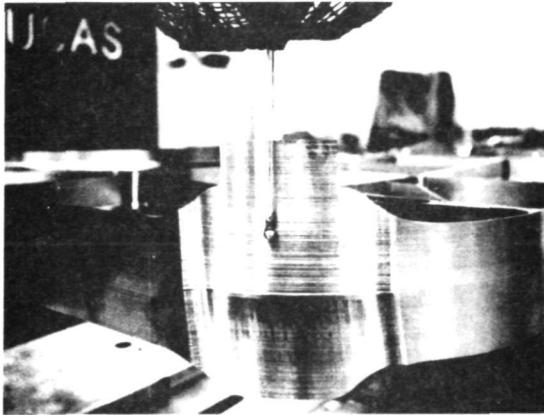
DNC Inspection Machine Probing Points on the Surface of the Part
